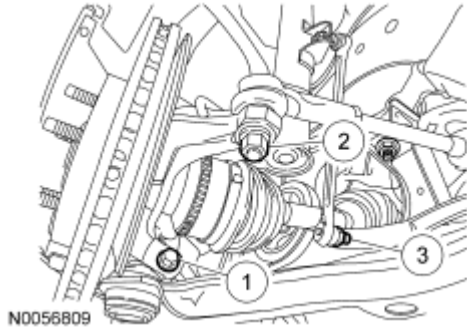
Identifying Lower Ball Joint-To-Knuckle Bolt, Retaining Nut And Stabilizer Bar Link
